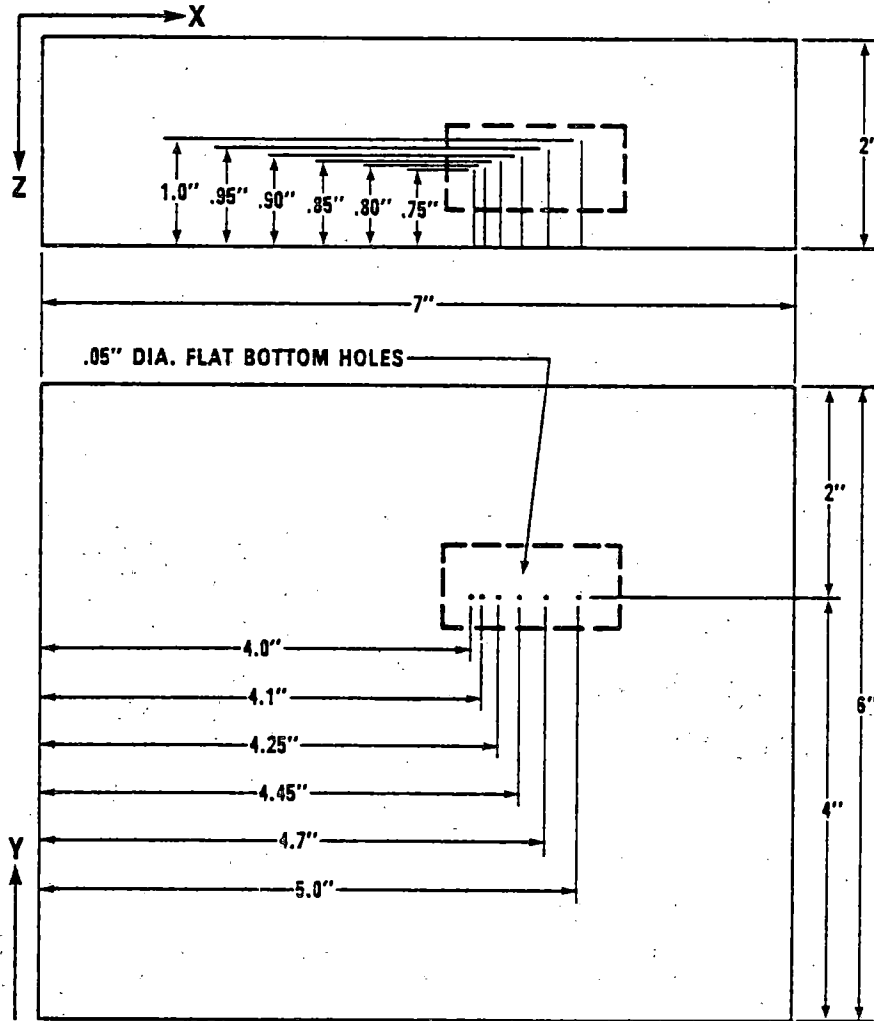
ALUMINUM TEST BLOCK DIMENSIONS
